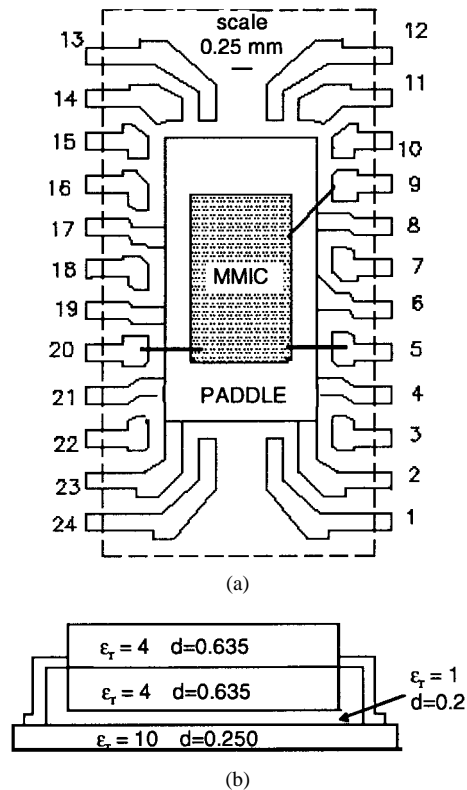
(a) Top view of paddle plane. (b) Side view of package and substrate layers.
